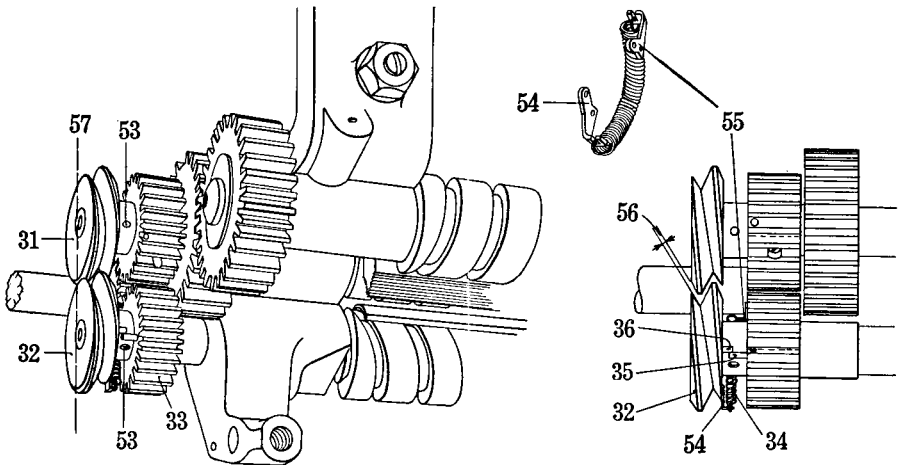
View showing the "spiral automatic" at the ends of the two front distributor screws. The short piece of V-screw thread 31 is pinned to the end of the front distributor screw, upper; and the similar piece 32 is pinned to the end of the front distributor screw, lower.
